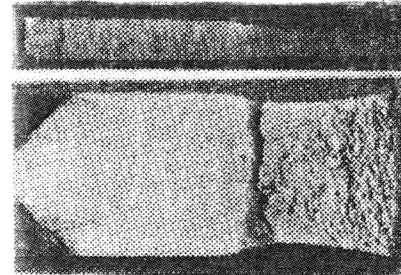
Fracture Surfaces of Fatigue Crack Growth Specimens
